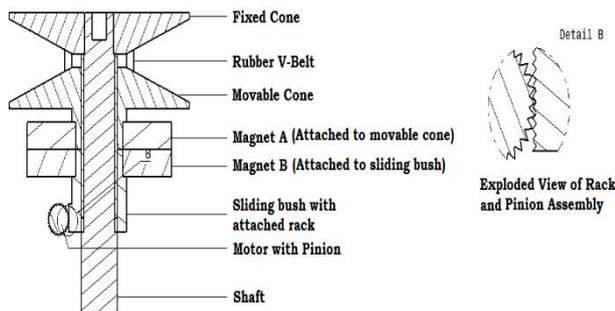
Sectional view of the driver shaft assembly with a magnified view of the rack and pinion
